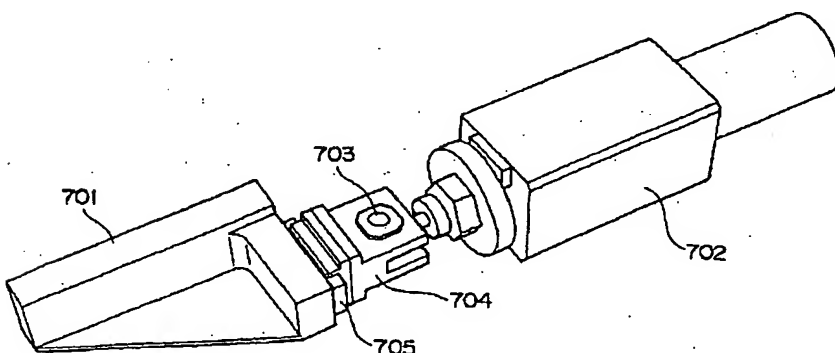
It is drawing explaining the case where only one substrate holding fixture constitutes a vacuum housing.
